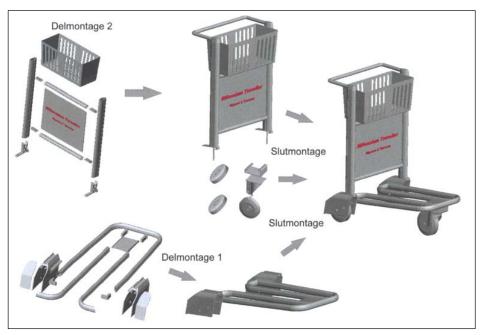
The first design concept (delmontage ~ part assembly, slutmontage ~final assembly)
